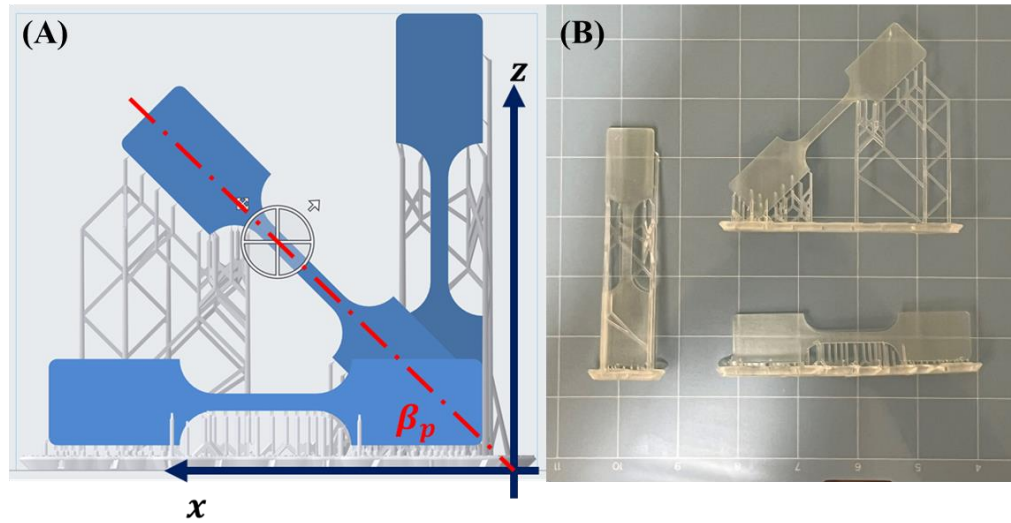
(A) CAD file in PreForm slicer software; (B) SLA 3D printed specimens after post-cured.
